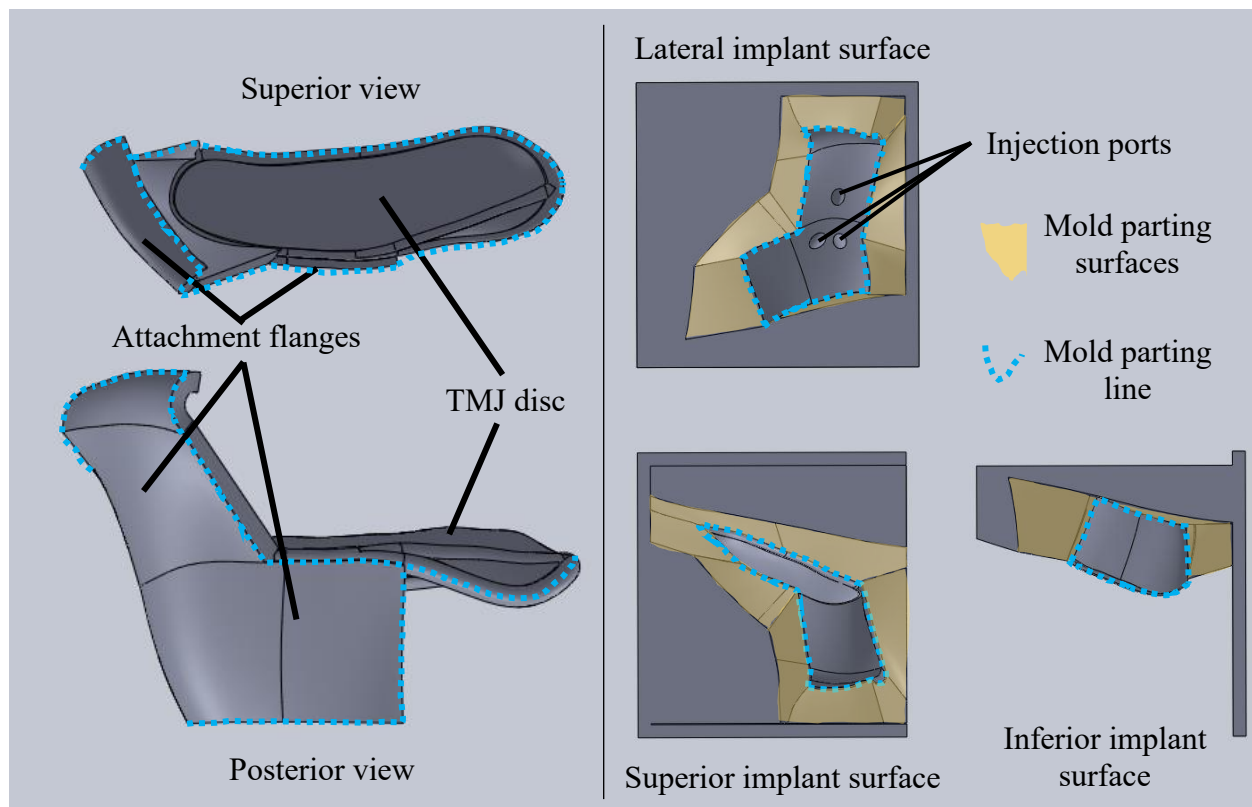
(left) Artificial TMJ disc design and (right) three-part mold geometry demonstrating mold parting line, parting surfaces, and injection ports.
